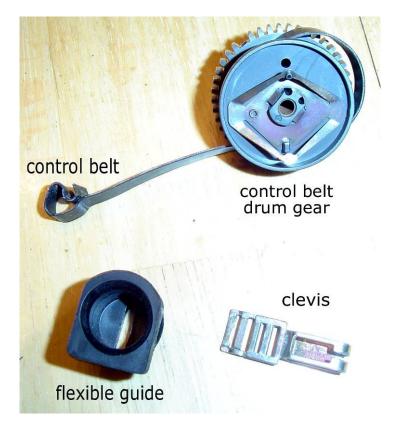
Detail of control cable drum gear, flexible guide, and clevis
